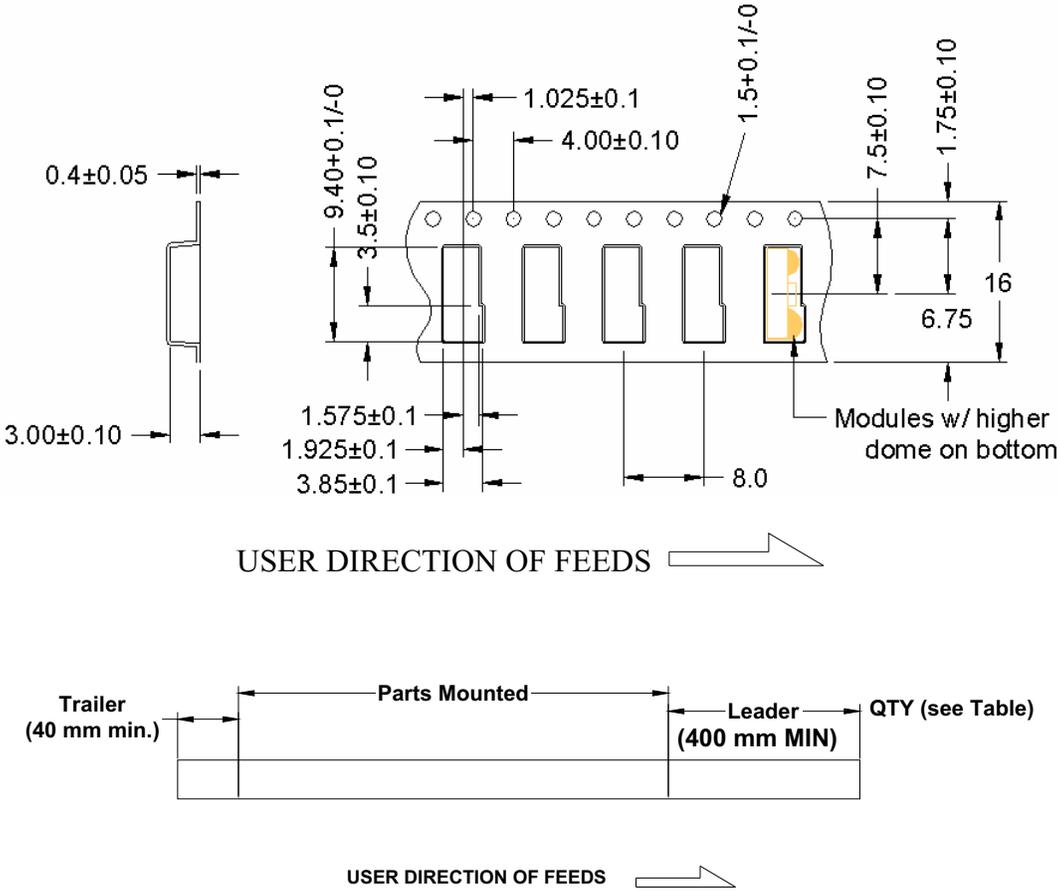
ZHX1810 Tape Dimensions and Configuration (Unit: mm)
